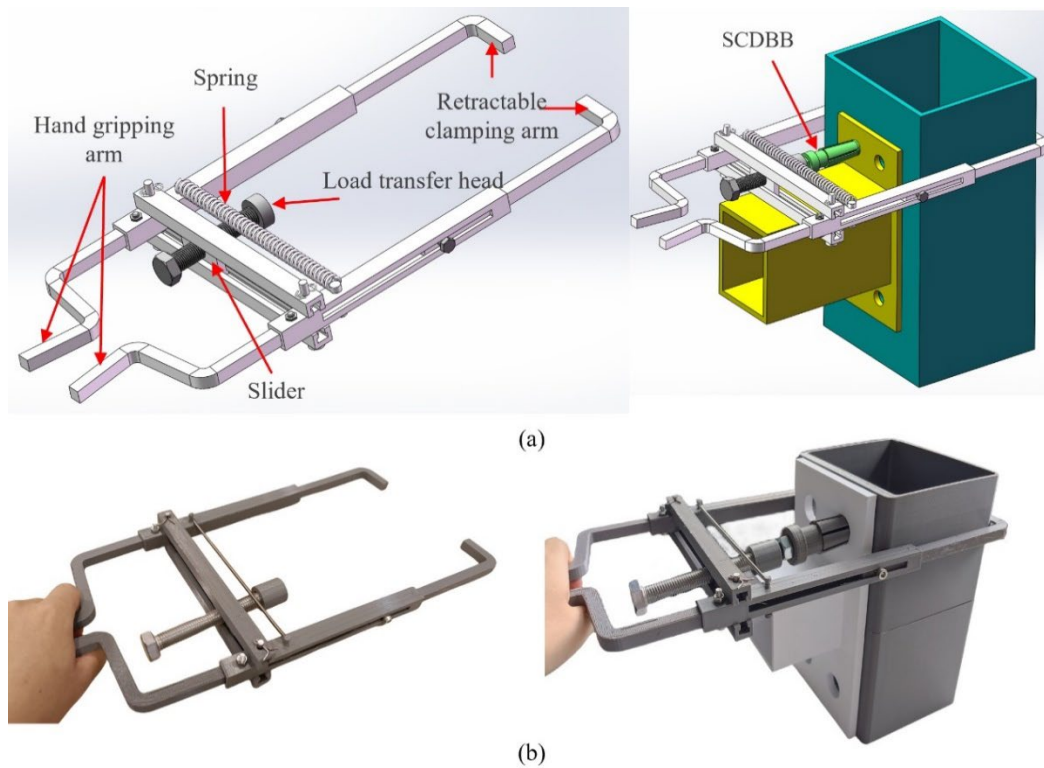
Auxiliary installation tool for the SCDBB: (a) schematic diagram, (b) 3D printing prototype.
